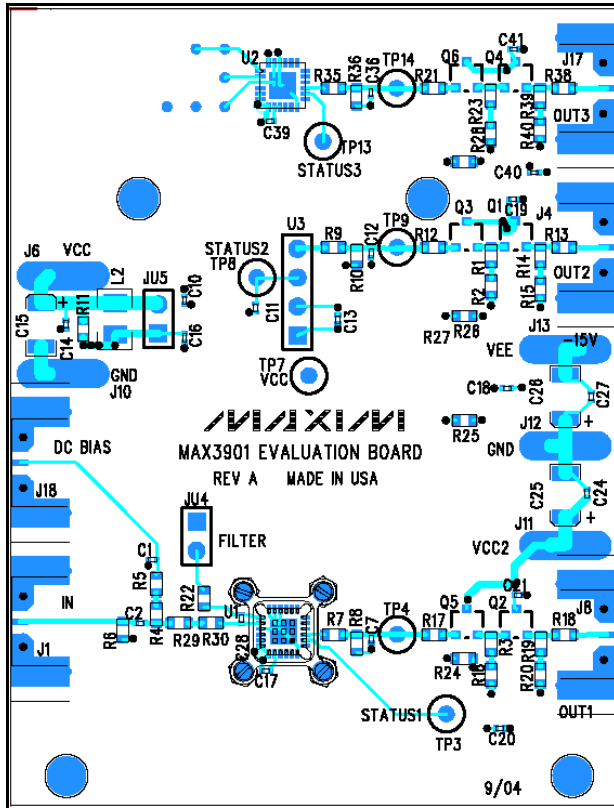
MAX3901 EV Kit Component Placement Guide - Component Side
